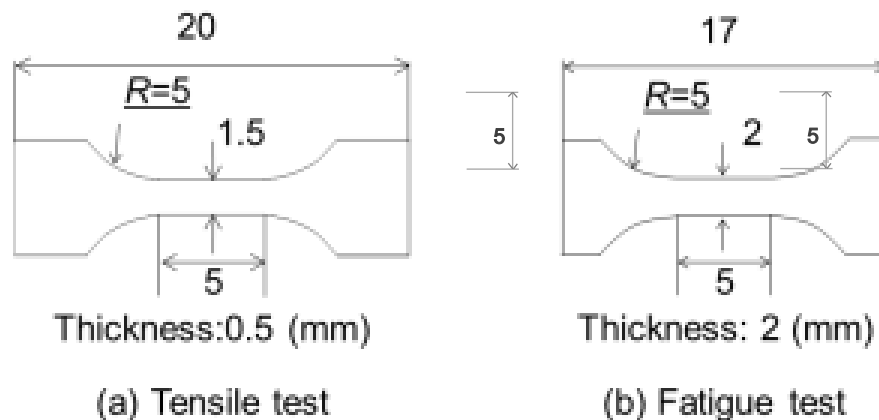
Schematic drawing of tensile (a) and fatigue (b)
